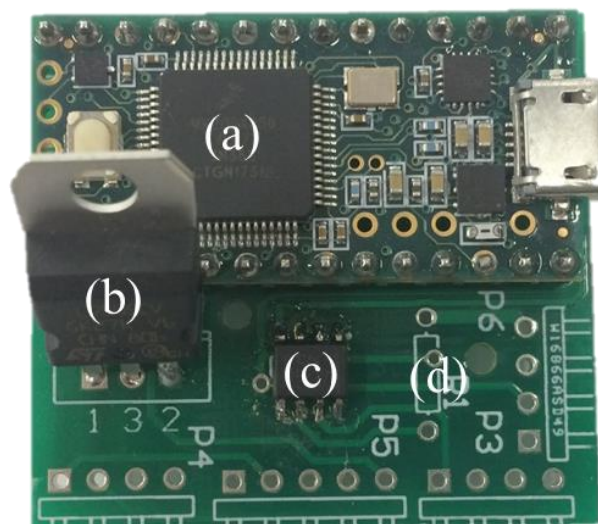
The Printed Circuit Board (PCB) of the joint controller with dimensions 38mm×34mm, where (a) is the Teensy 3.2 microcontroller, (b) is the voltage regulator (STMicroelectronics, L7805CV), (c) is the CAN transceiver (Texas Instruments, SN65HVD23X) and (d) is the termination resistor.
